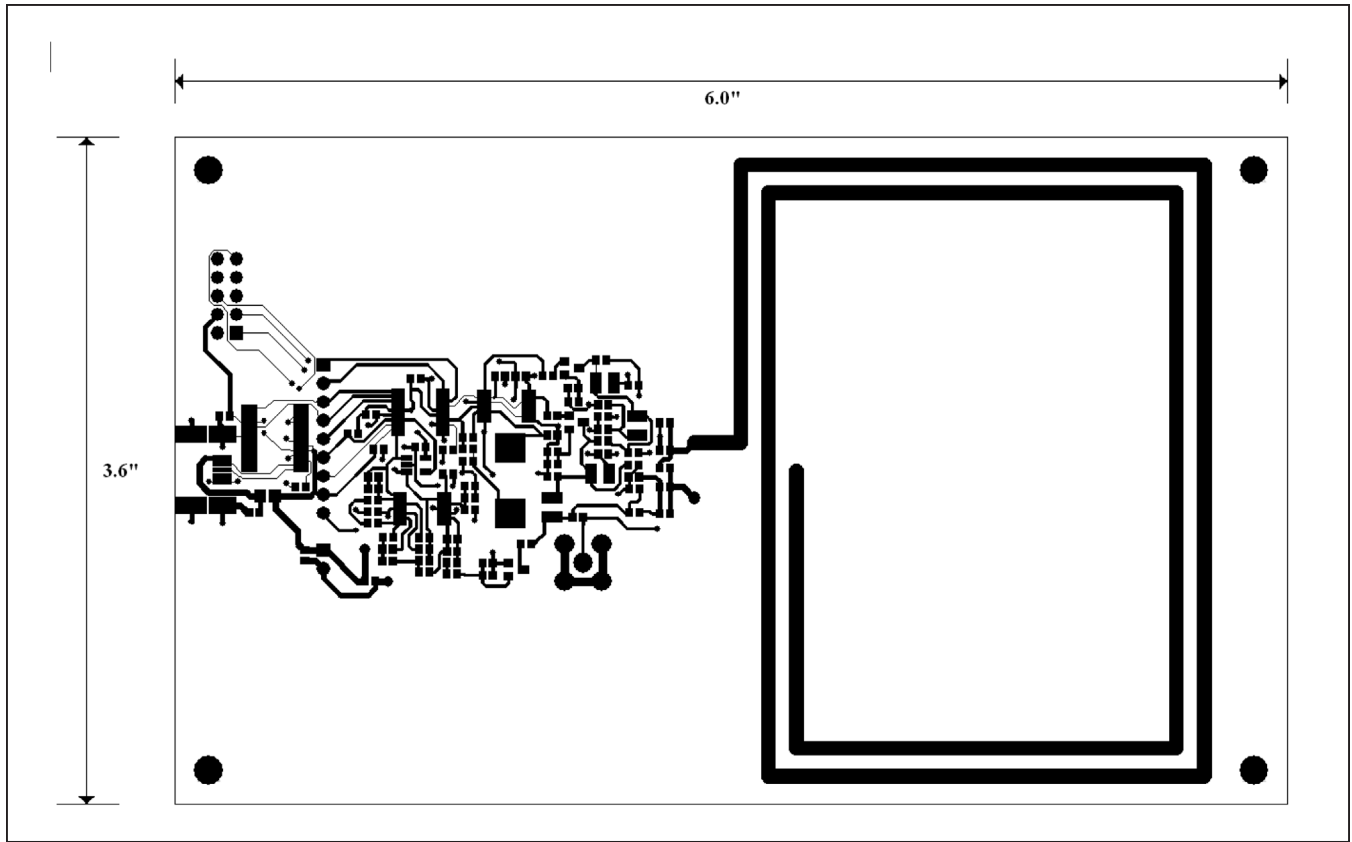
MAX66903 EV Kit PCB Layout—Top Copper
